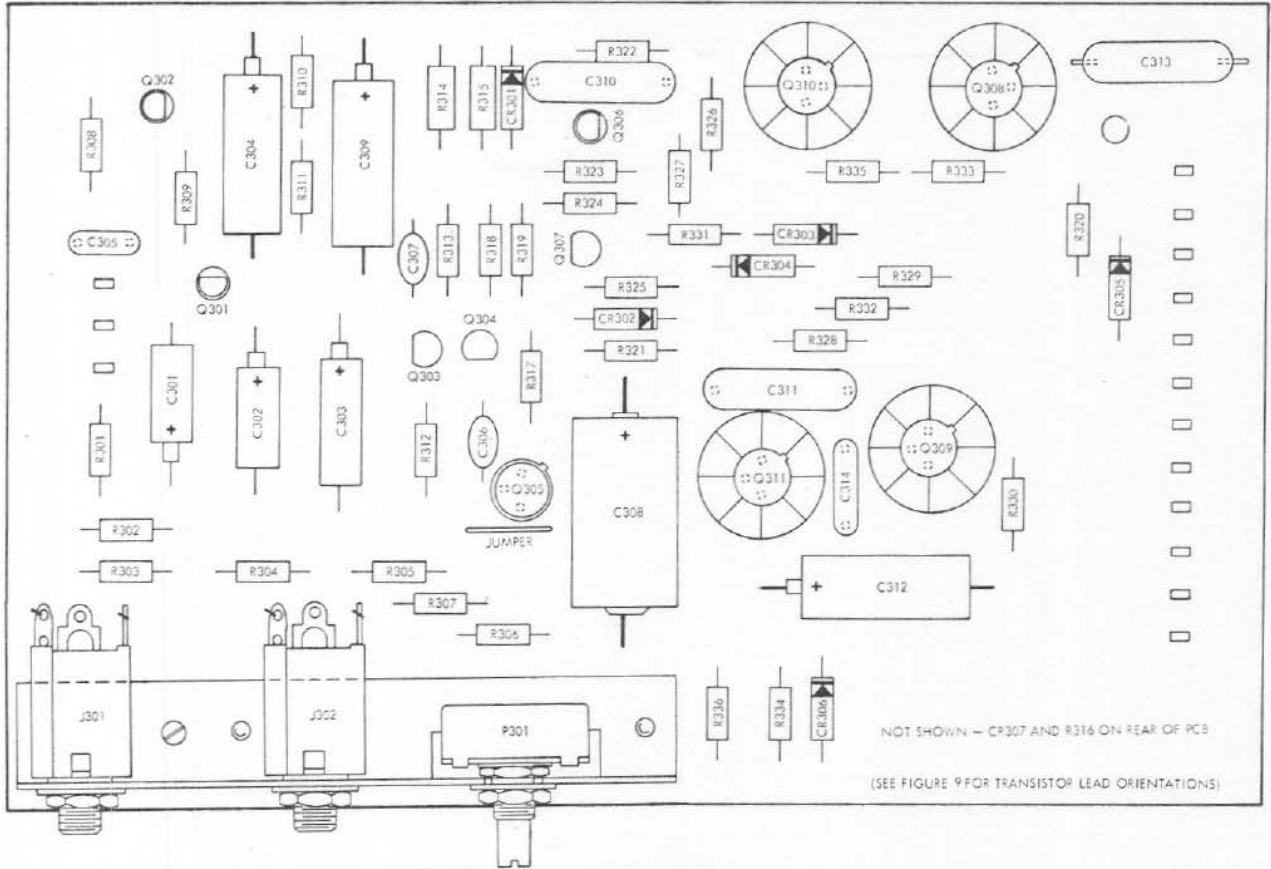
Electronic Part Locations (3D604-1), Driver Amplifier PCB Assembly
